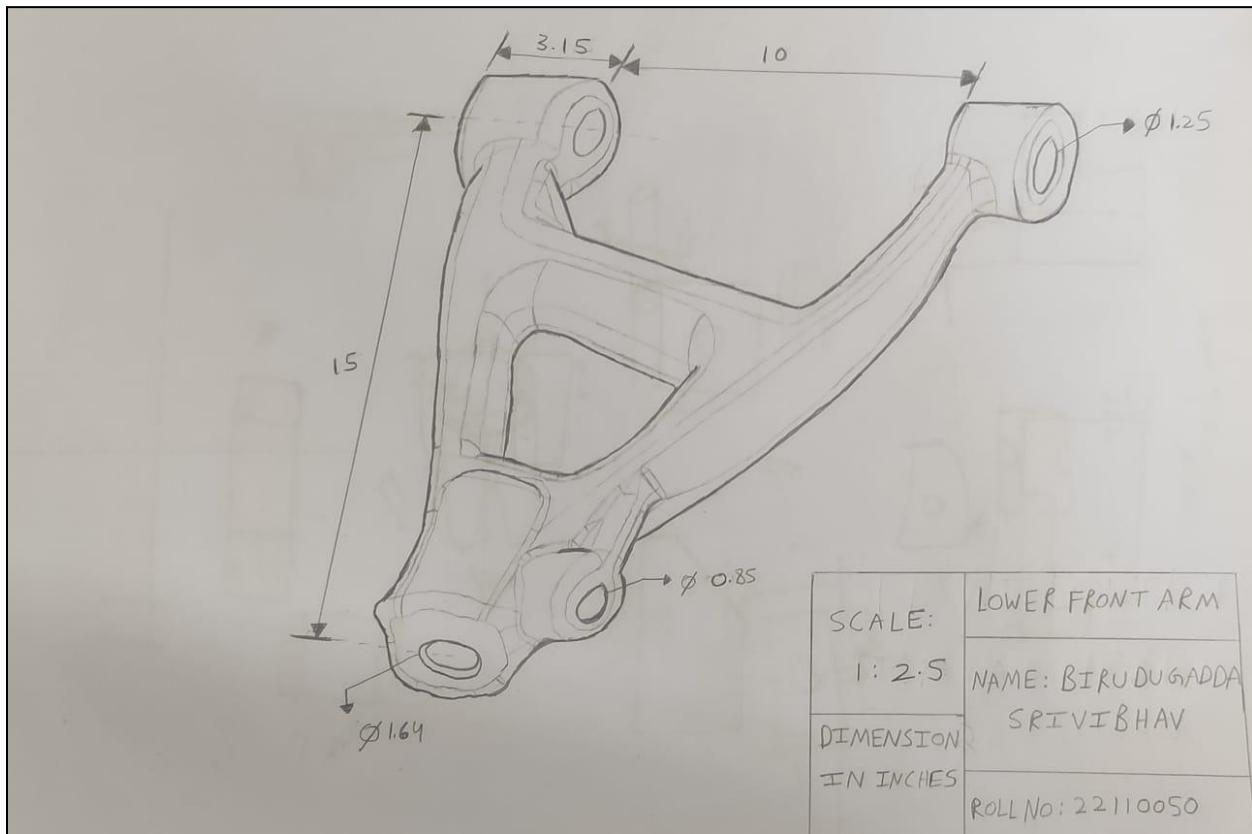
view of the front lower with dimension drawn by Birudugadda Srivibhav
